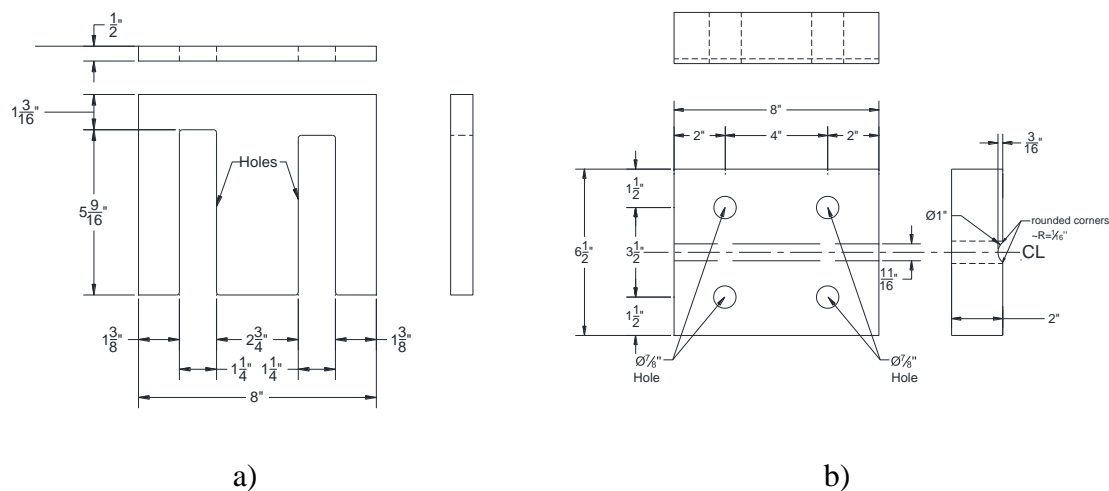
Design details of the hinge mechanism for bar anchorage
